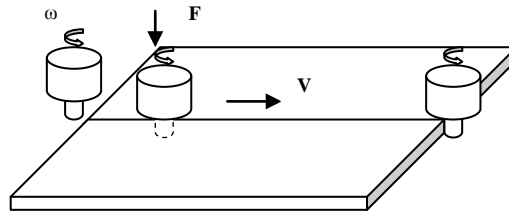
Schematic representation of friction stir welding process
